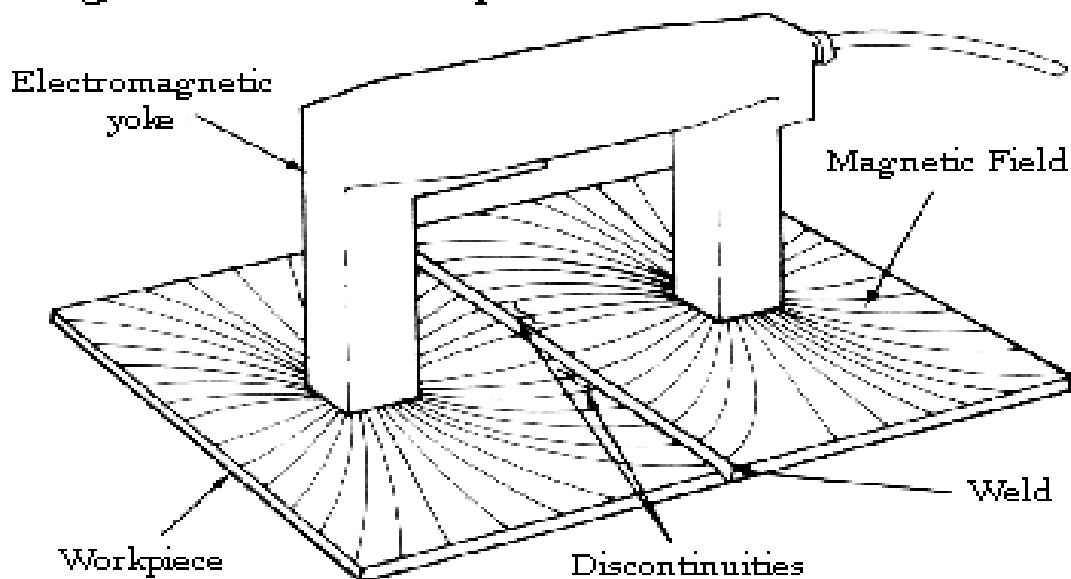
Magnetic particle test (Aerial inspection Co, 2012)
